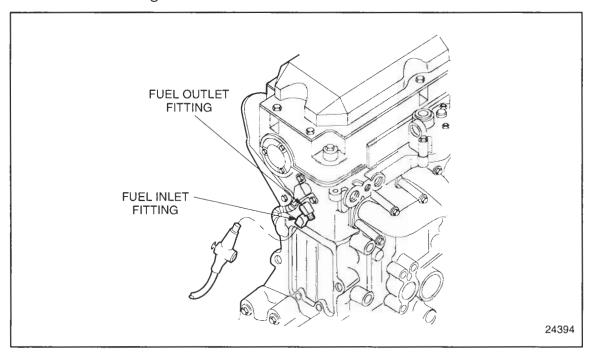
Removing Fuel from Cylinder Head Internal Passages
